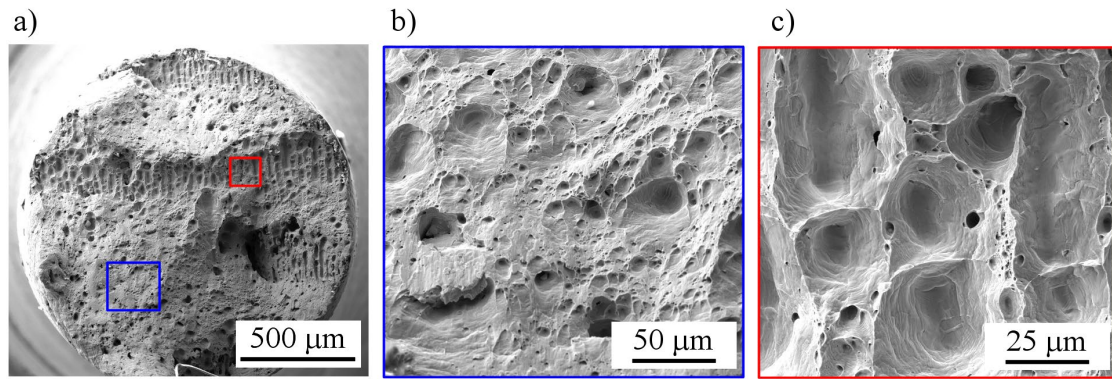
Detail of fracture surface of tensile specimens for LPBF variant at RT. Overview of fracture surface (a) ductile dimples (b) and details of gas porosity (c).
